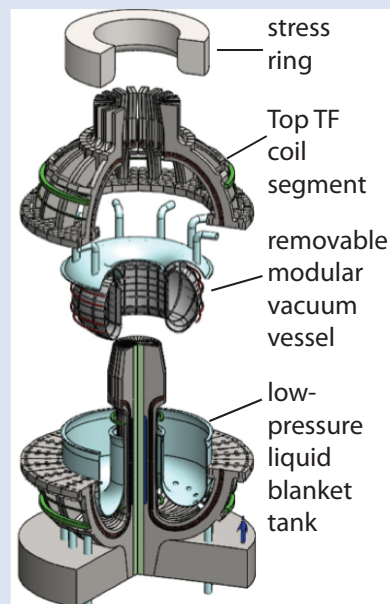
ARC is a JET-sized fusion pilot with demounted TF coils allows for modular replacement of internal components and an immersion liquid blanket [5]
